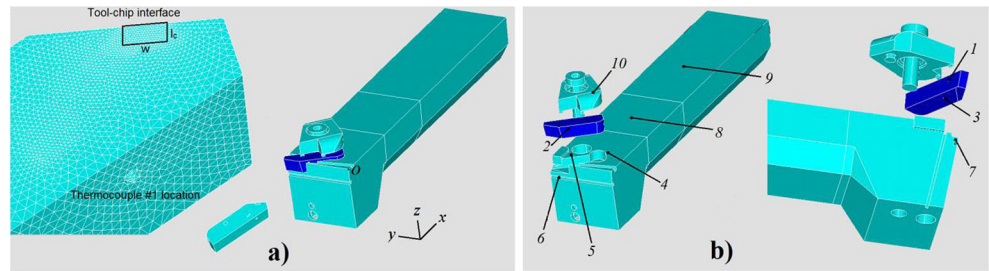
Cutting tool and tool holder CAD models: a 3D CAD model, close view of the meshed cutting tool and the tool–chip interface and b thermocouples location
